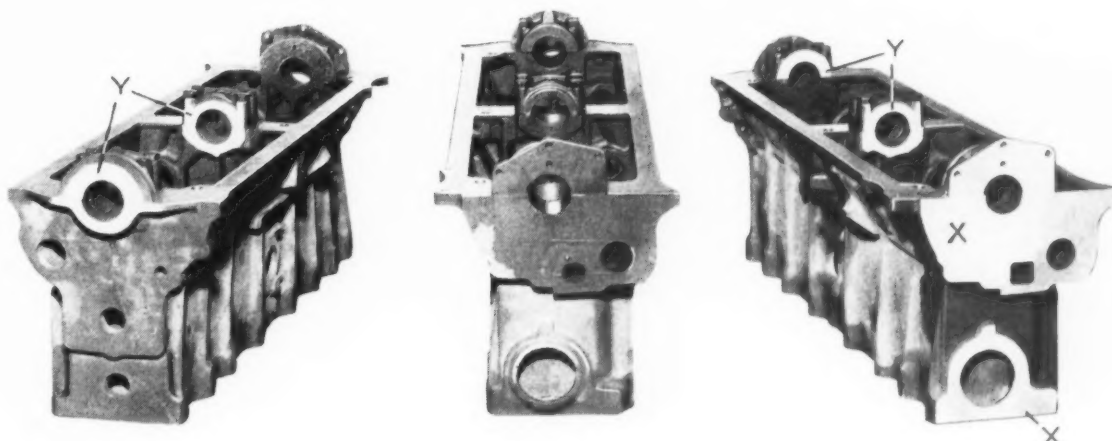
To the Right and Left are Shown Cylinder Blocks that have been Milled, while Center View Shows Block as it Arrives at the Machine
